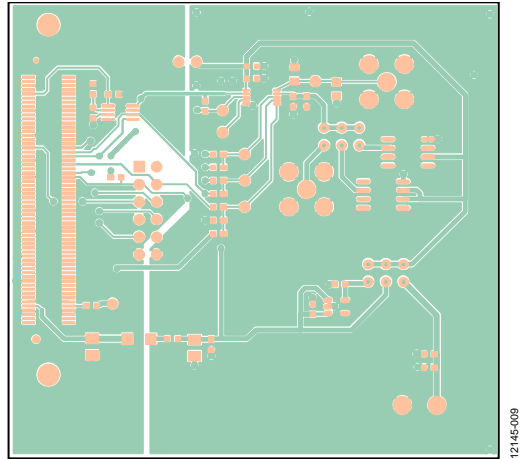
EVAL-AD5693RSDZ Component Side Printed Circuit Board (PCB) Drawing
